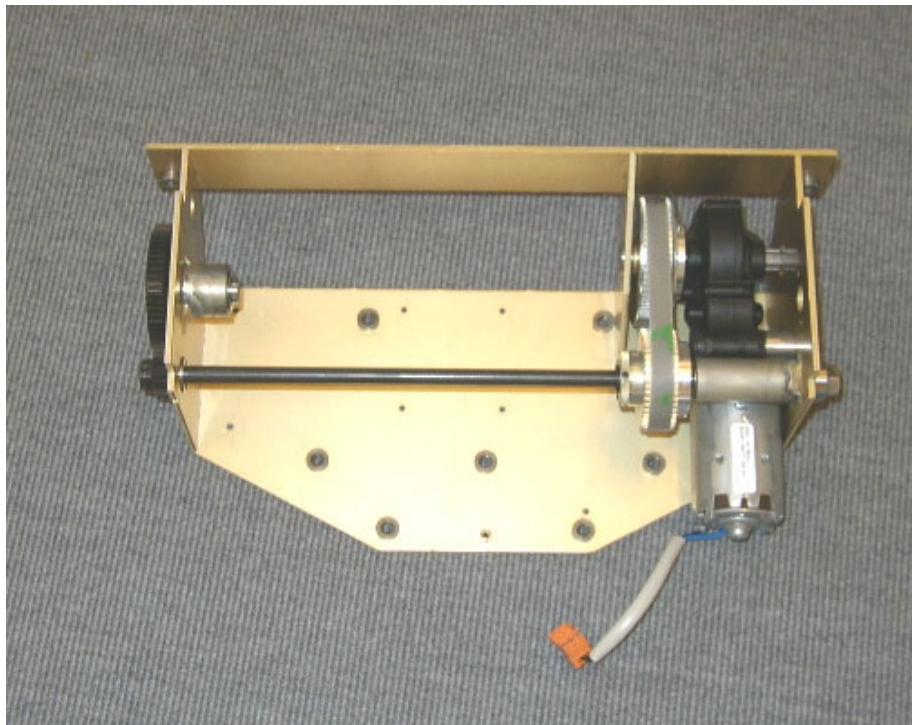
DDD9ACO1429A Motor and gear assembly
